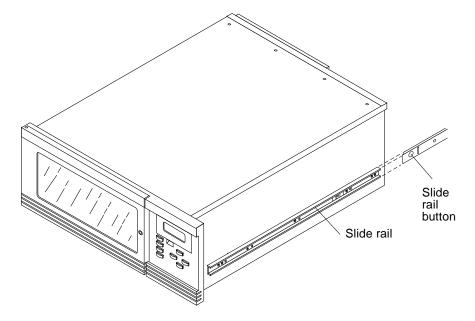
Dismounting or Mounting the Tape Library from the Slide Rails
